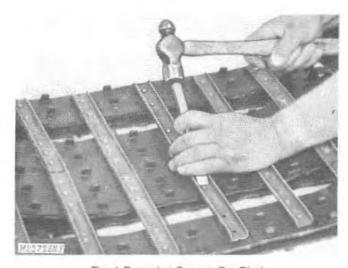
Removing Grouser Bar Rivets (Track Removed for Photo Purposes)
